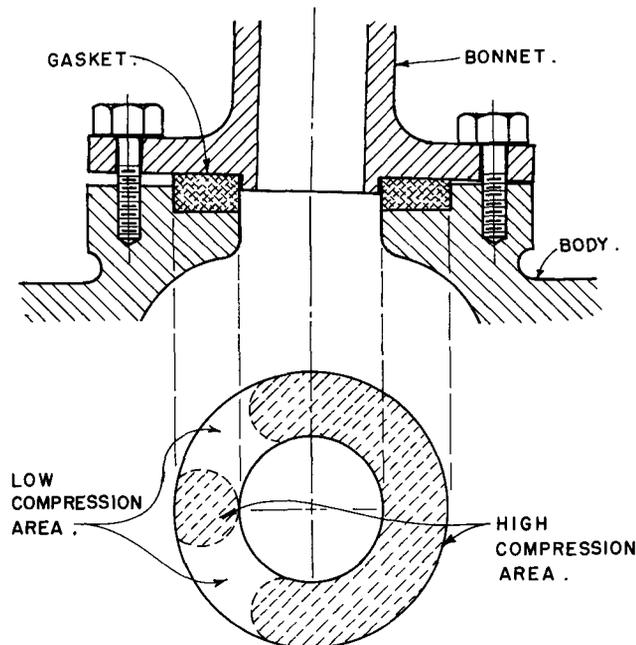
Spiral-Wound Gasket in Small Valve.
